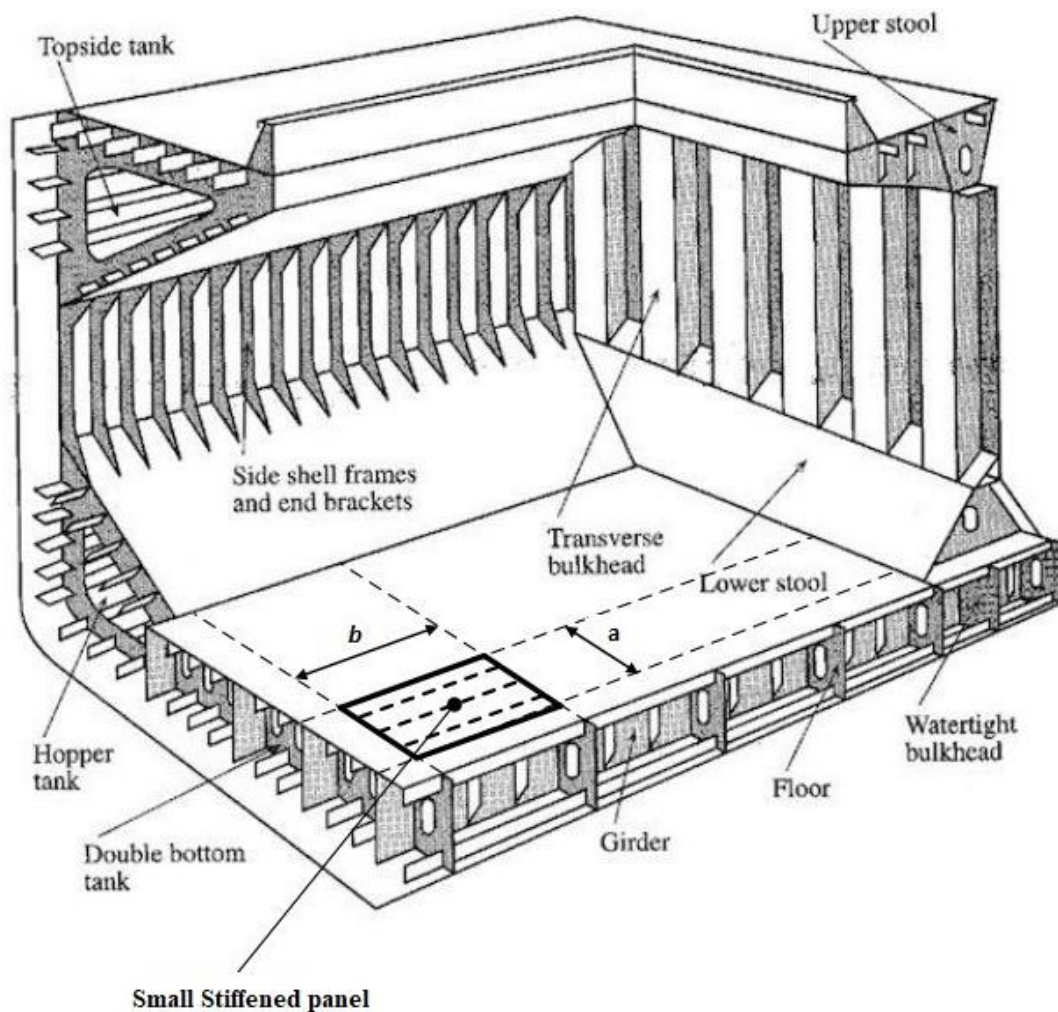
Stiffened panel between 2 neighboring girders and floors at a bulk carrier's hold., [11]
